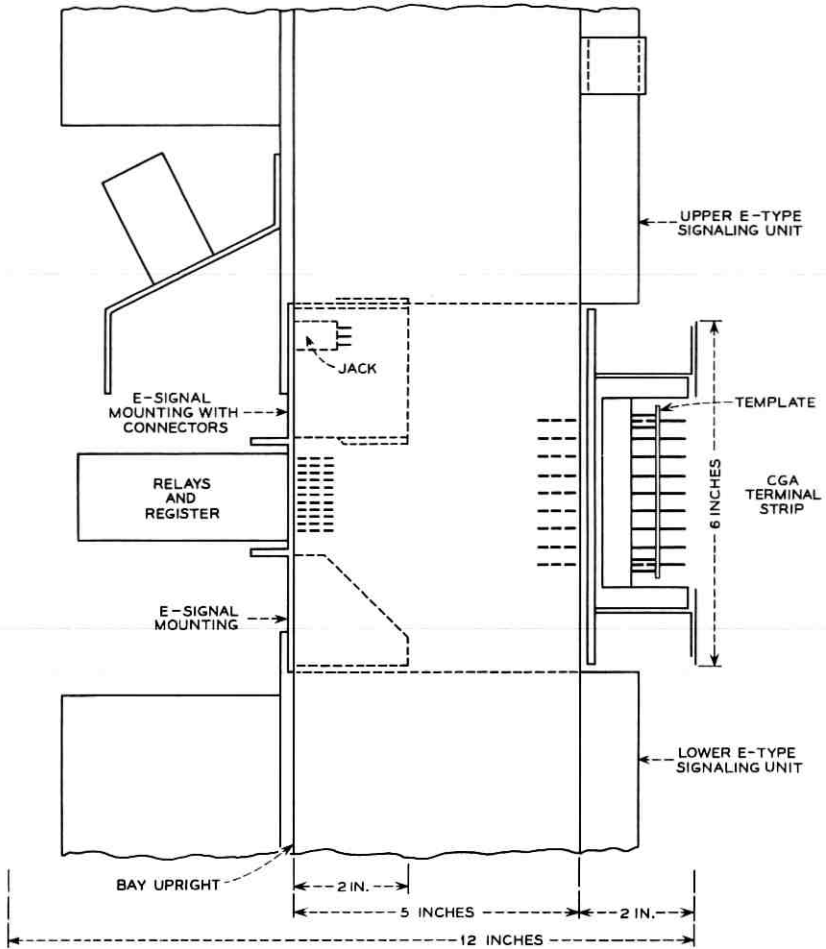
Carrier group alarm and E-type signaling shelves, showing arrangement of equipment.
